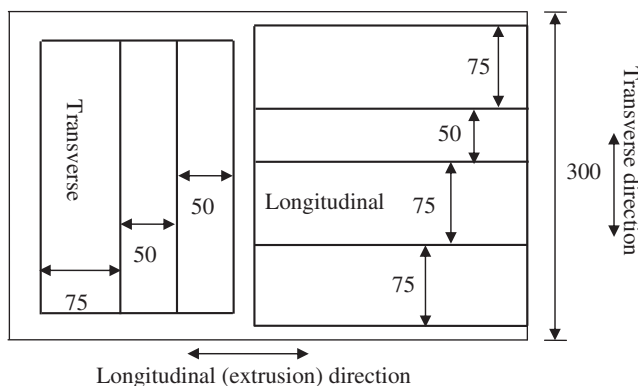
Illustration for where door plate samples were cut from extruded door panel (all dimensions in mm).
